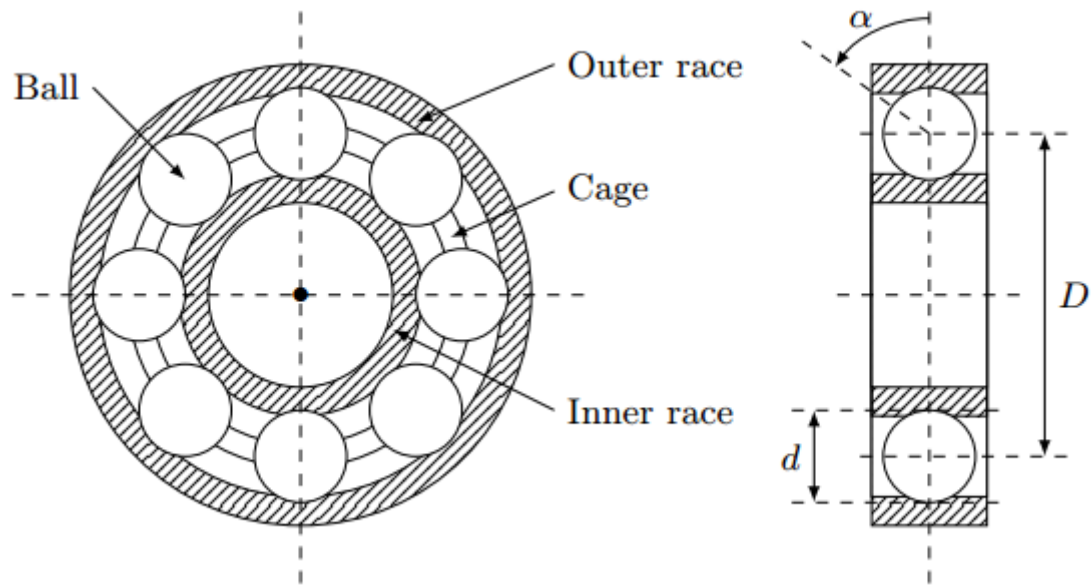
Bearing structure with mean dimensions (El Bouchikhi et al, 2015)
